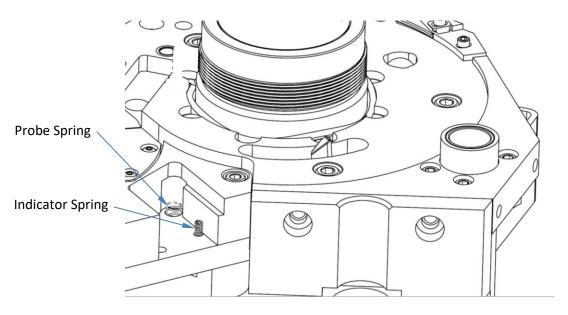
Pace Probe Retractor and Indicator Springs in Spring Pockets as shown.
